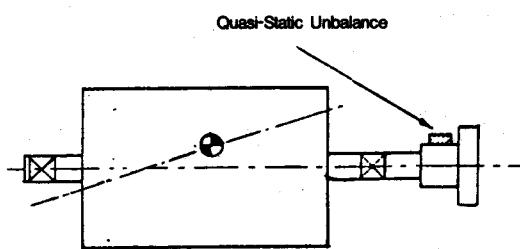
Unbalance in Coupling Causes Quasi-static Unbalance in Rotor Assembly
